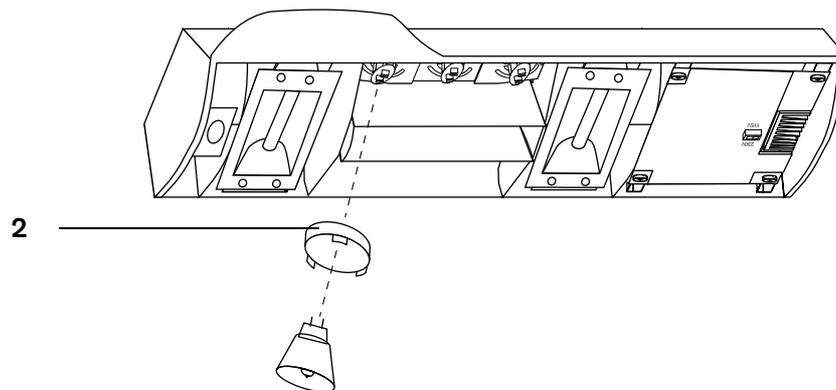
View of the radiant heater, mounting the phototherapy lamps
